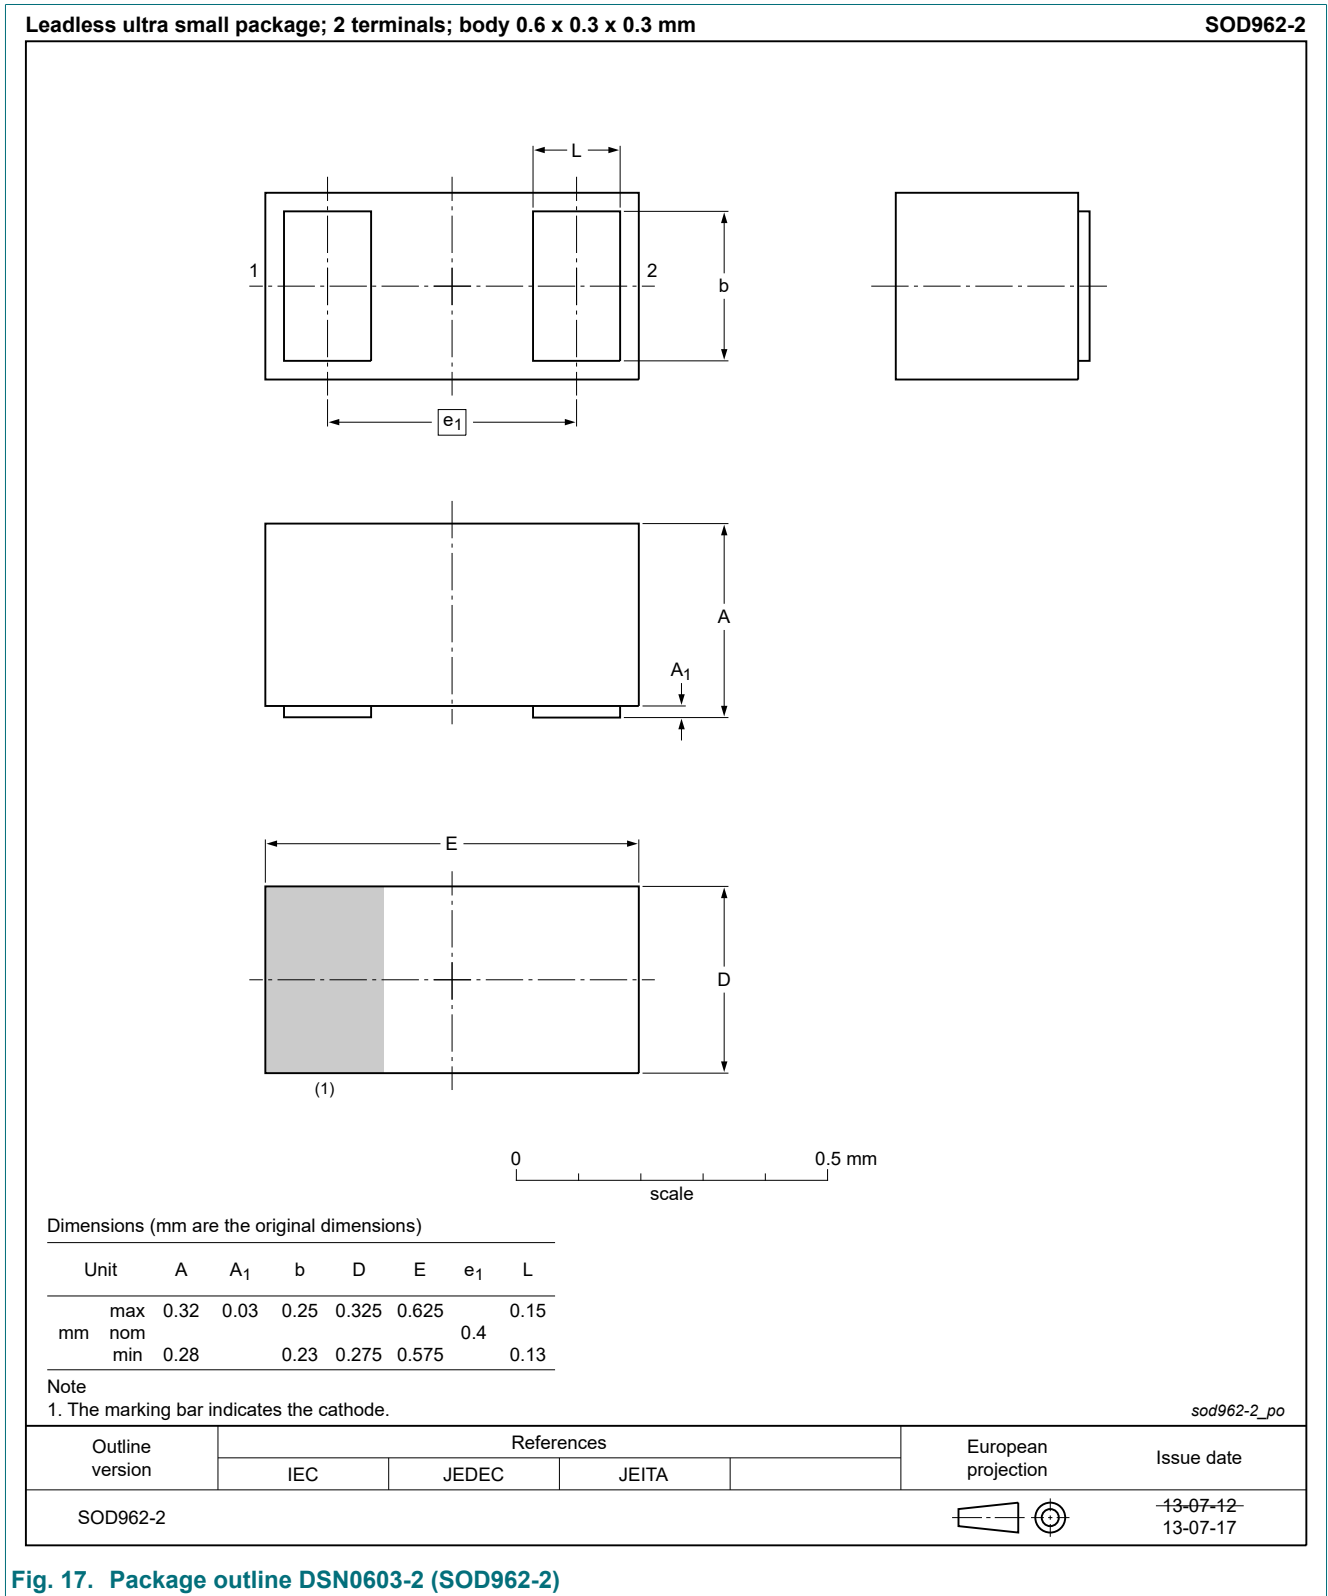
Package outline DSN0603-2 (SOD962-2)
